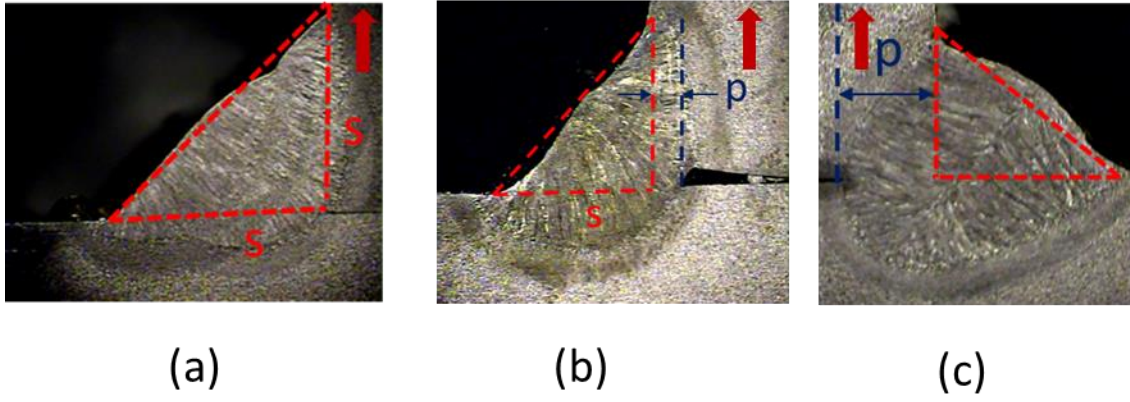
Typical weld macros: (a-c) Representative fillet weld cross-sections indicating a varying degree of penetration (p)
